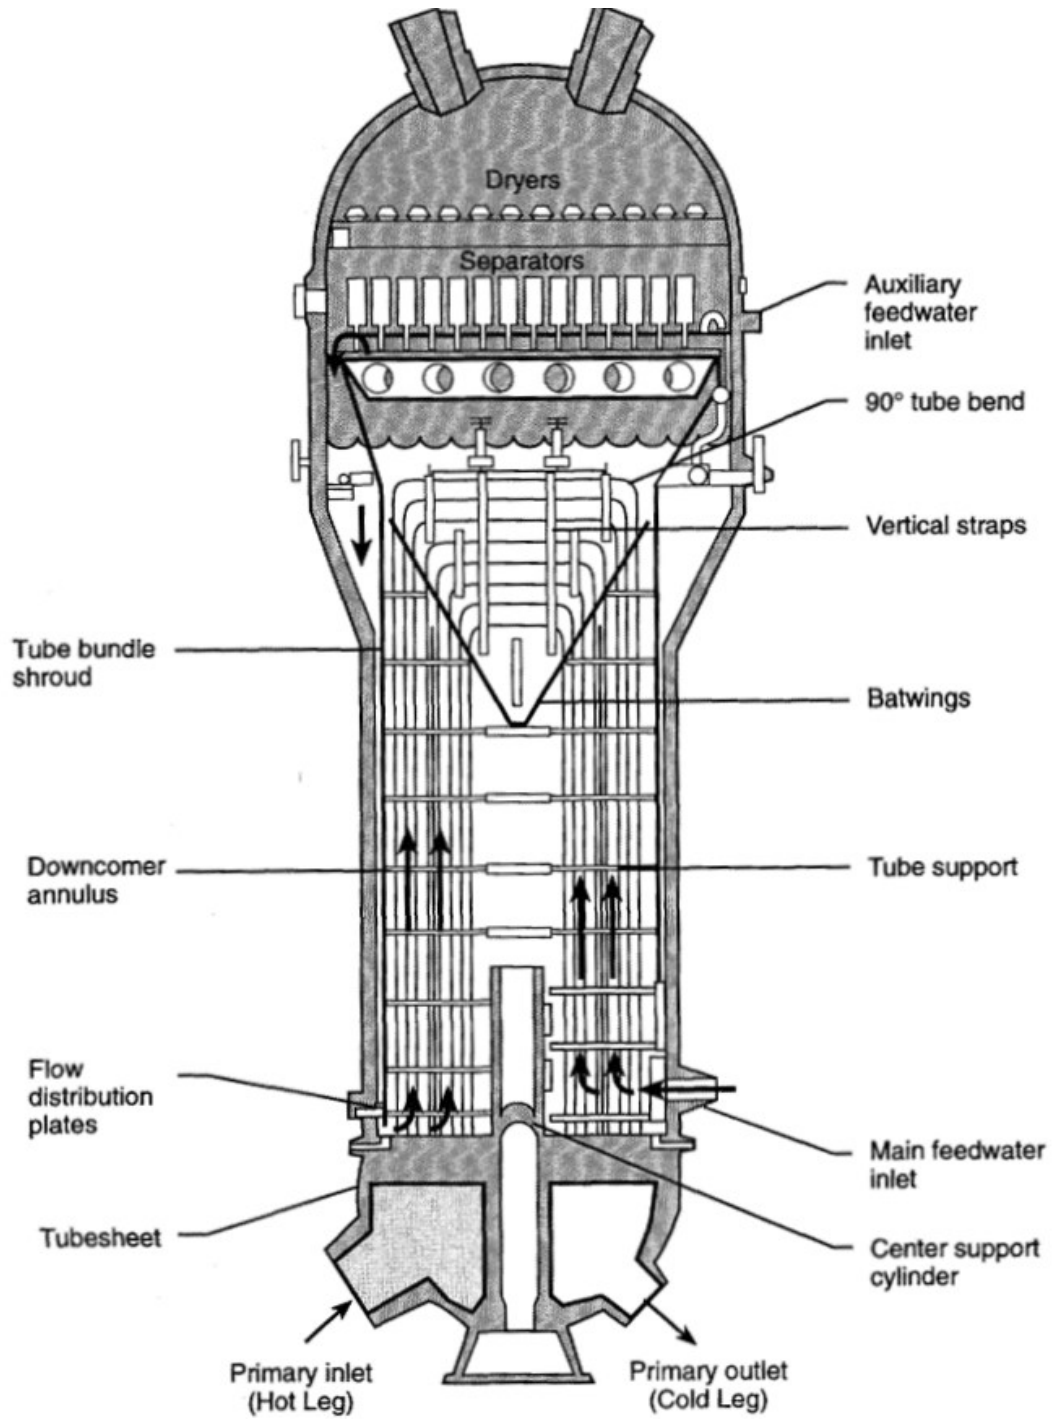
Schematic drawing showing internal details of the APR1400 steam generator [1]
